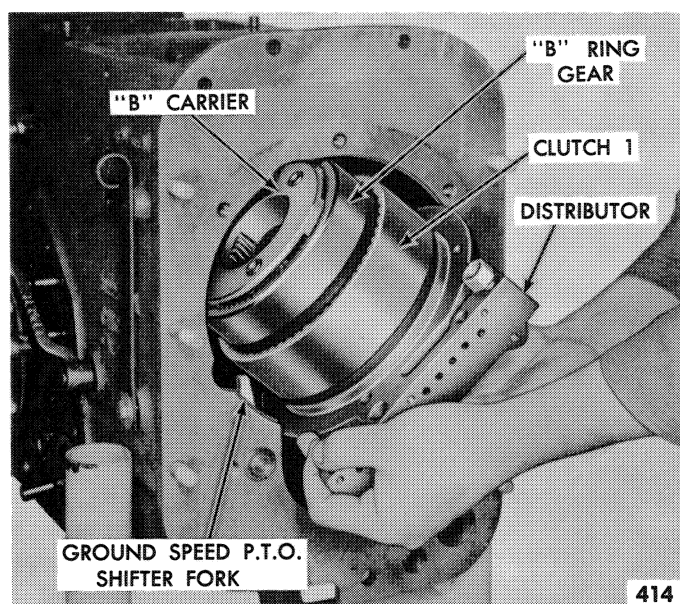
Removing the Distributor, Clutch 1, "B" Ring Gear and "B" Carrier
